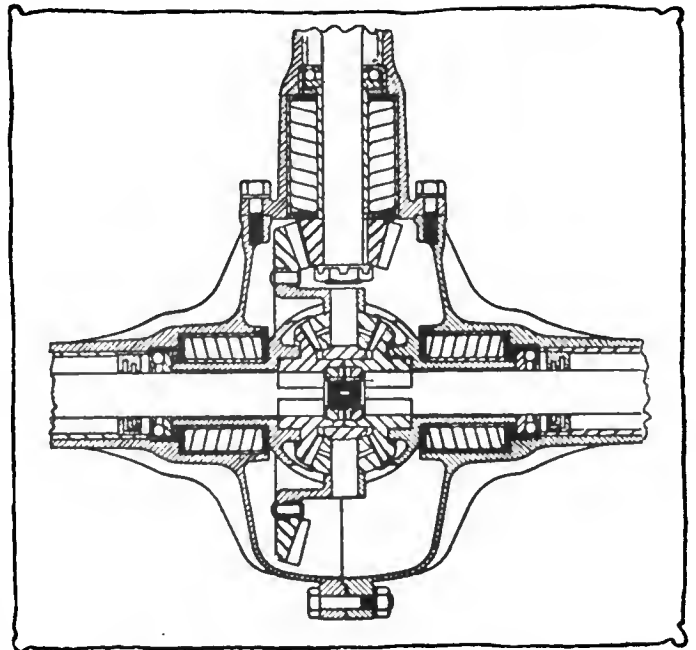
Rear axle, using nothing but roller bearings with ball thrust
